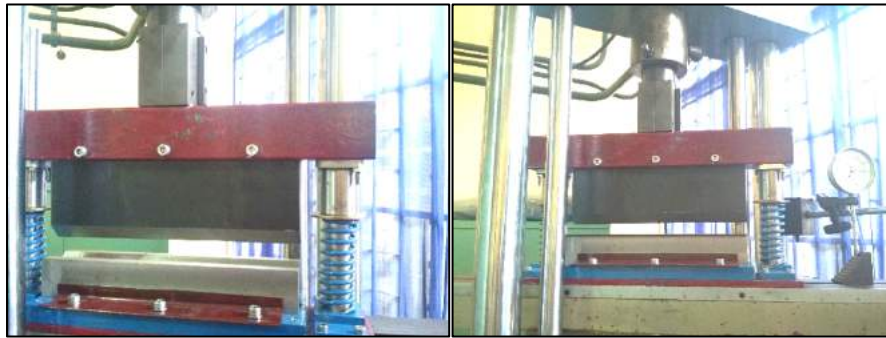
Press tool die set on UTM (Universal Testing Machine)
